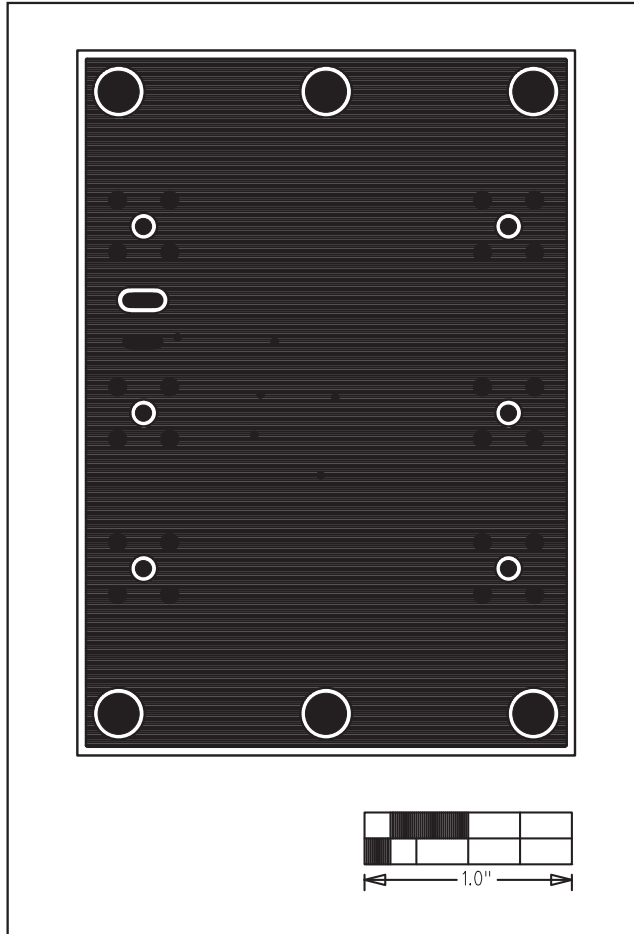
MAX9652 EV Kit PCB Layout—Solder Side
